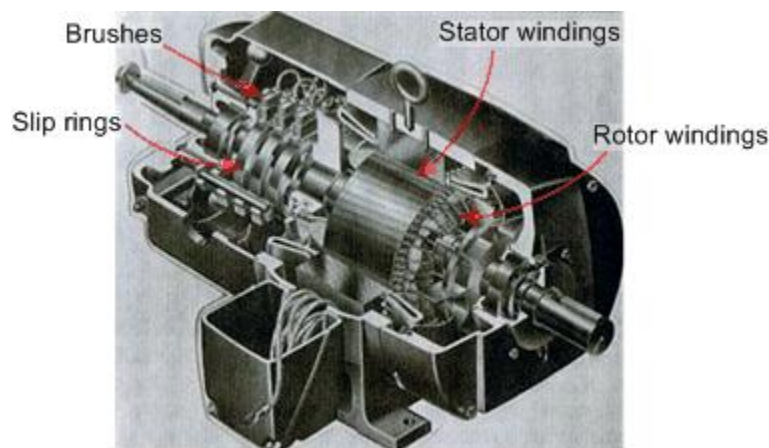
Cutway section of a wound-rotor induction machine [20]
